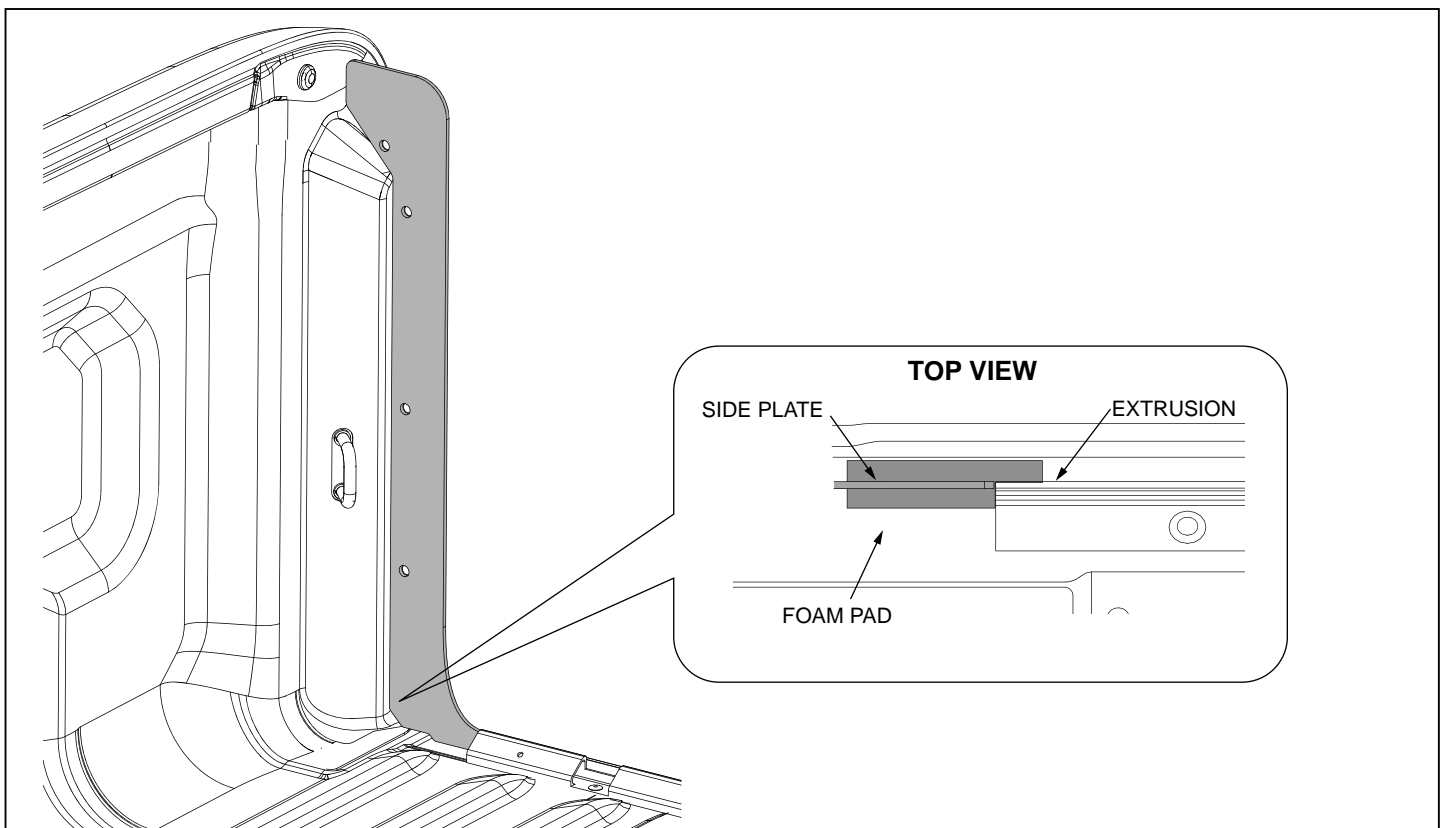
Secure the extrusion to the tub using rivets on the middle 3 holes. Secure the extrusion on the outermost positions using M5 screws, washers and nuts as shown.
